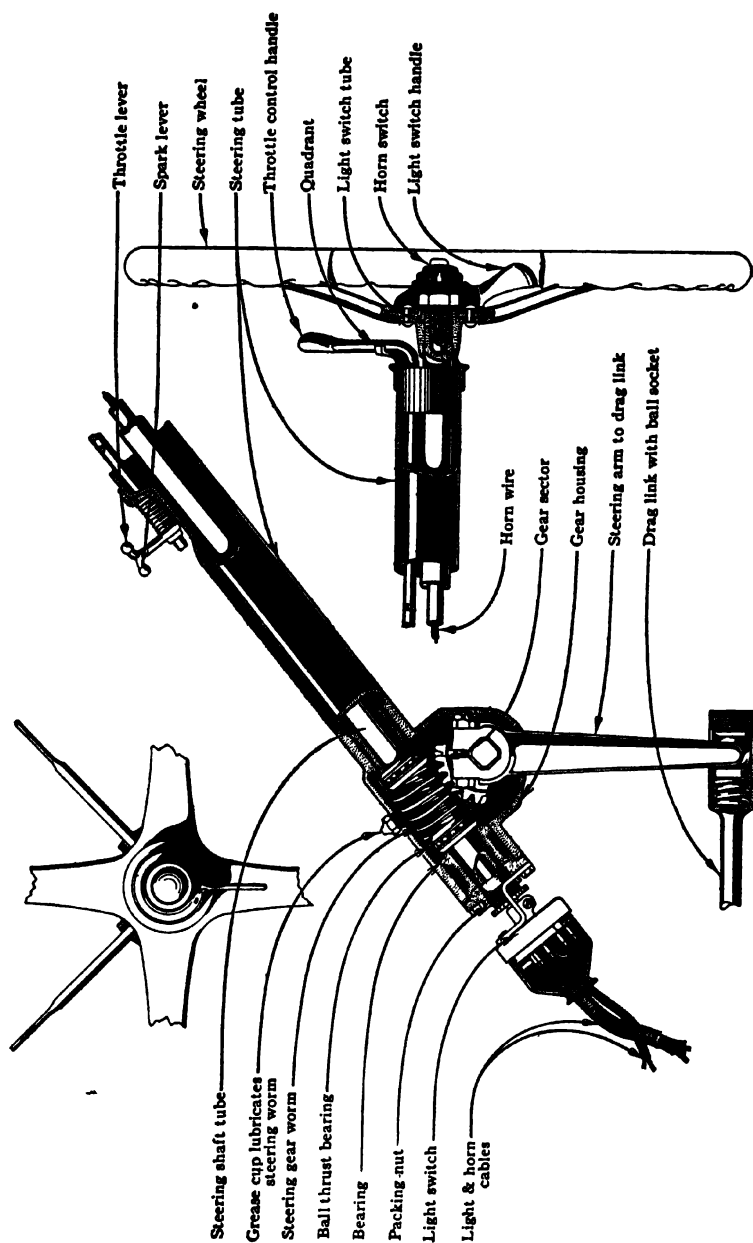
Steering-gear, Worm and Sector Type. Model "A" Ford.
